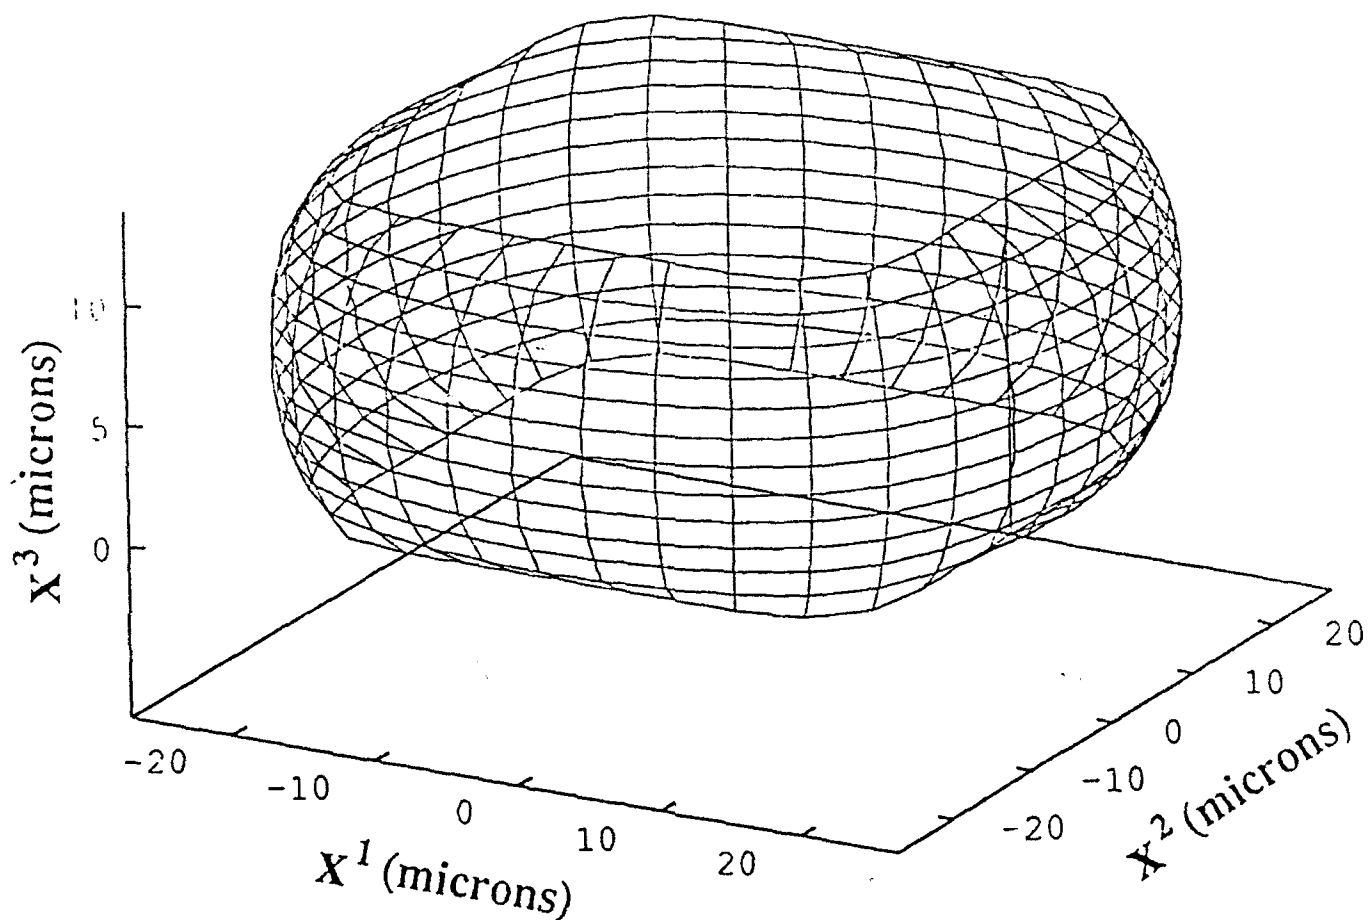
Solder joint profile for 40 μ m square pad and 20 μ m solder deposition height.
